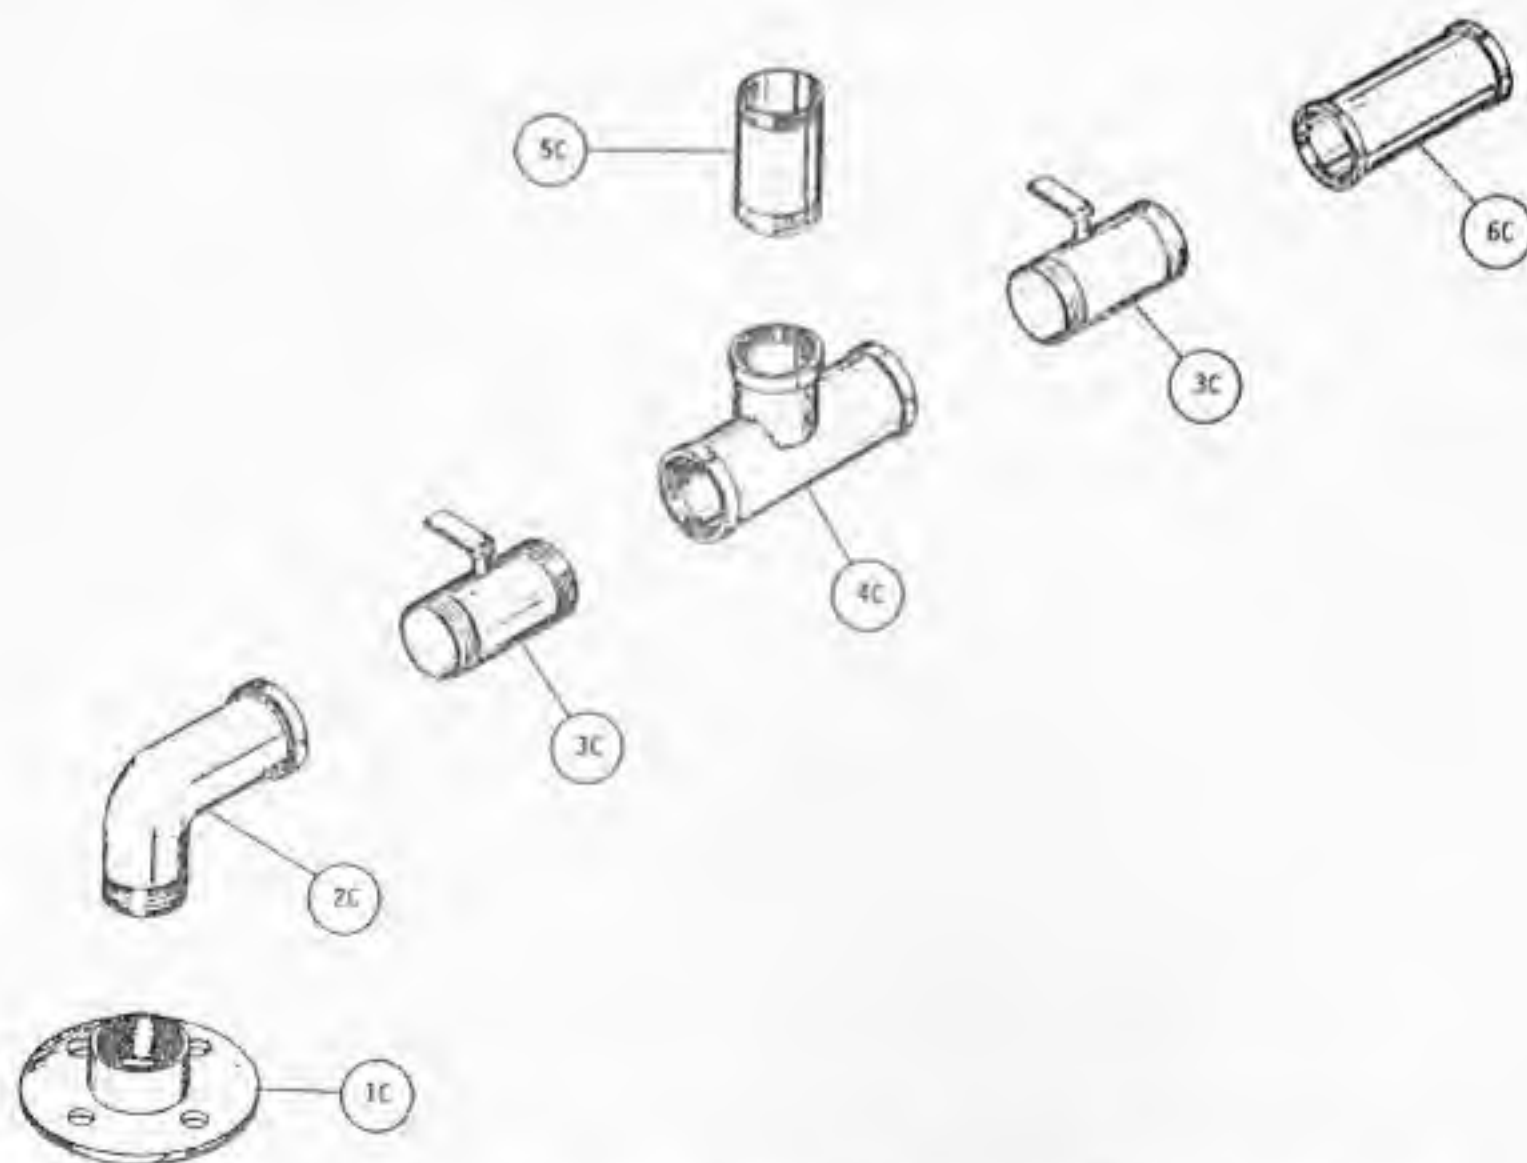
Exploded, schematic diagram of the carbureting unit and control valves.
